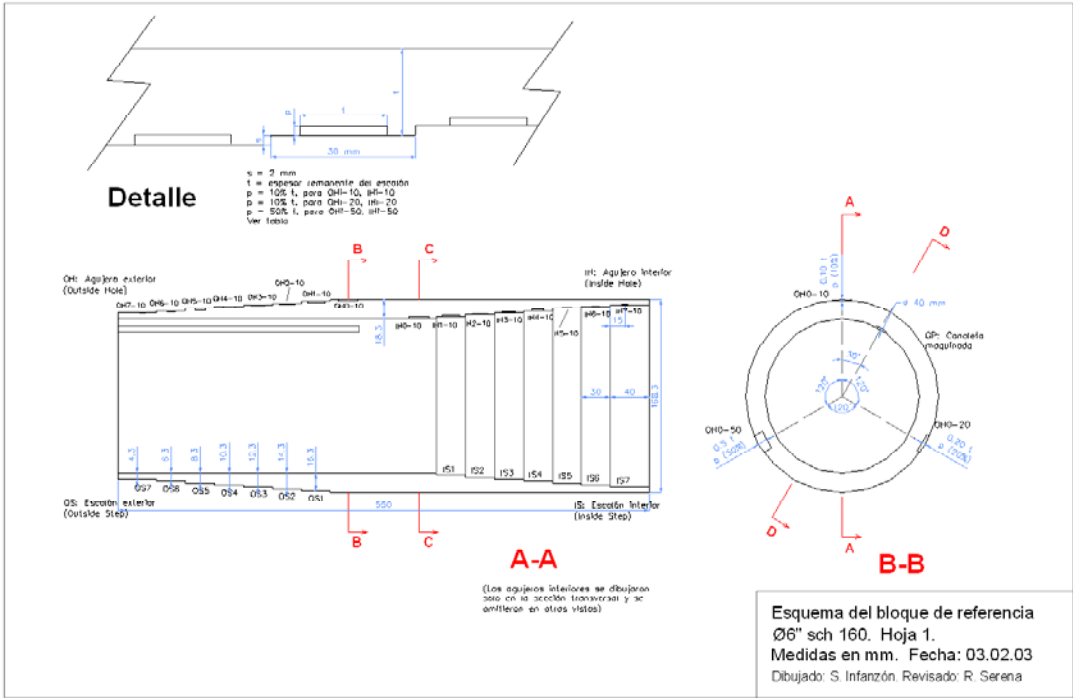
Drawing of one of the reference blocks (6 inch diameter) machined in Uruguay.
